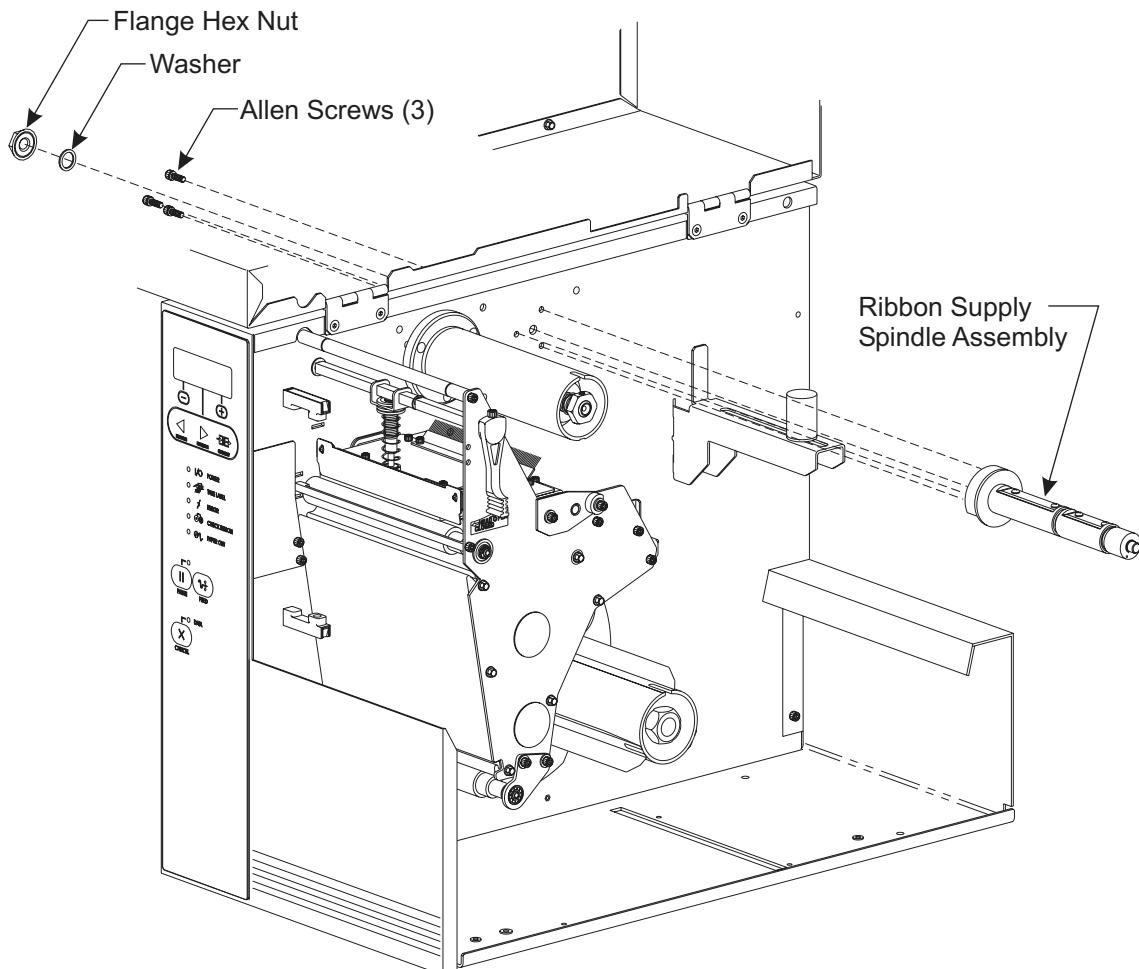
Ribbon Supply Spindle Kit Parts and Mounting Location
